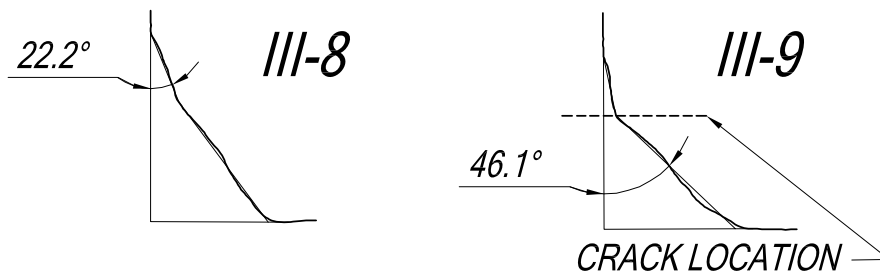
Weld profiles at the sections of crack initiation in specimens III-8 and III-9
